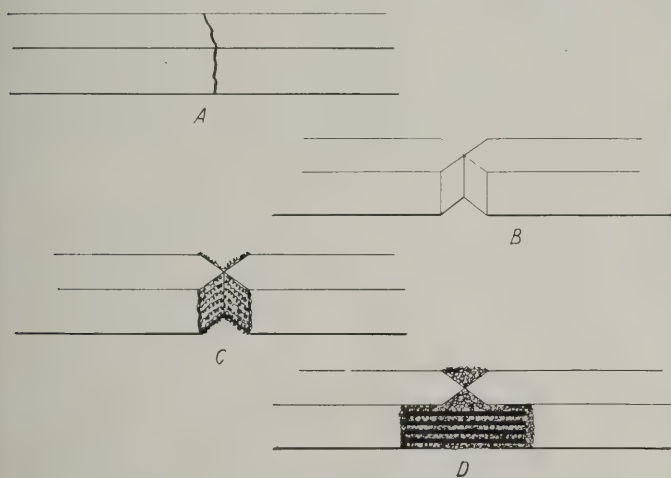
Various Steps in Welding a Broken Frame by the Electric Arc Process
